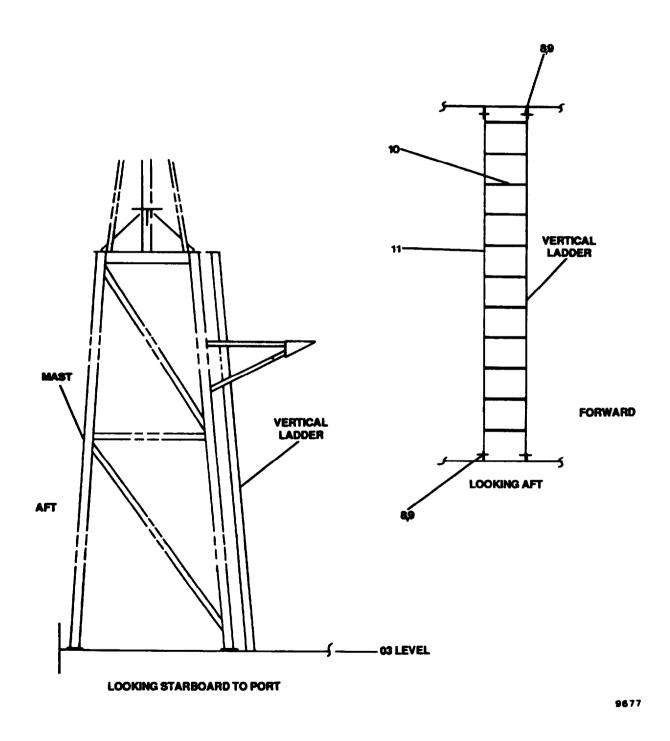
Pilothouse Top Ladders and Handrails (Sheet 4 of 4).
